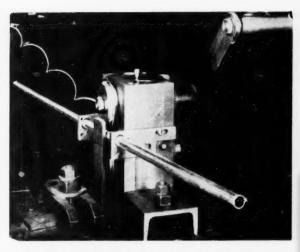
Machine used for making seam welds. Trimmed metal may be seen curling away.
